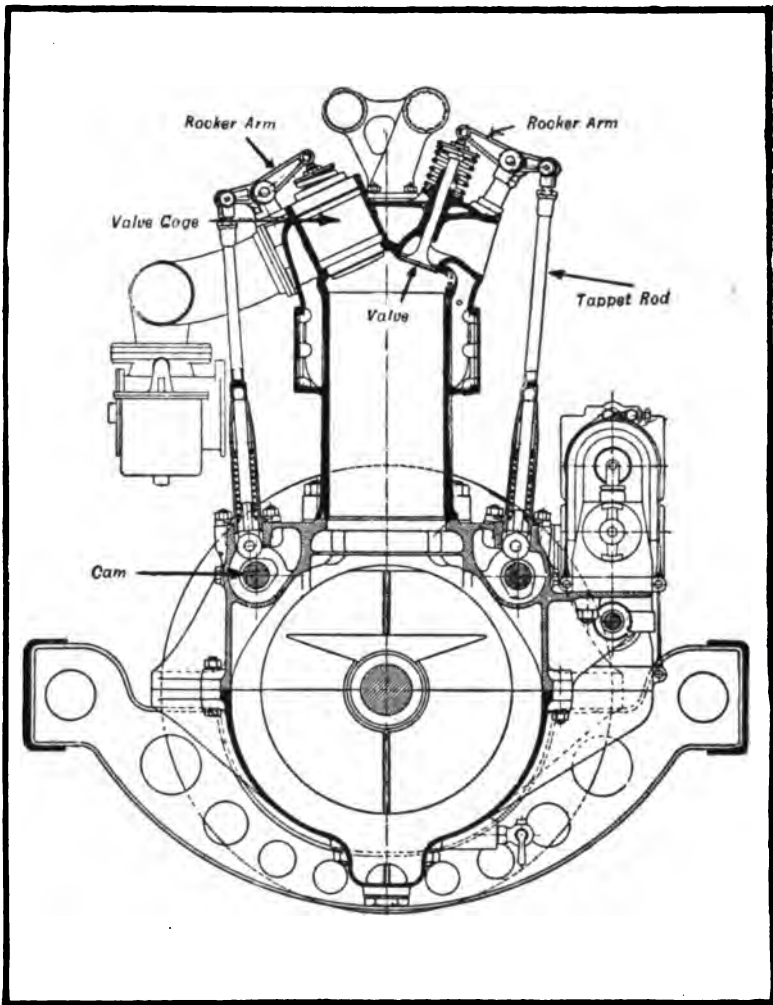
Benz racing motor, presented to show method of valve placing so these members open directly into the cylinder head.
